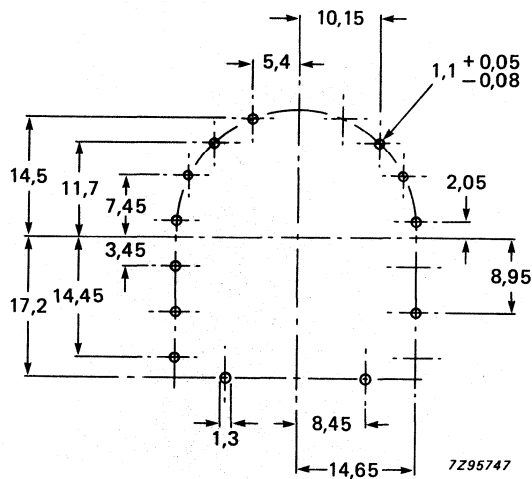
Hole pattern for mounting on a printed wiring board (solder side).
